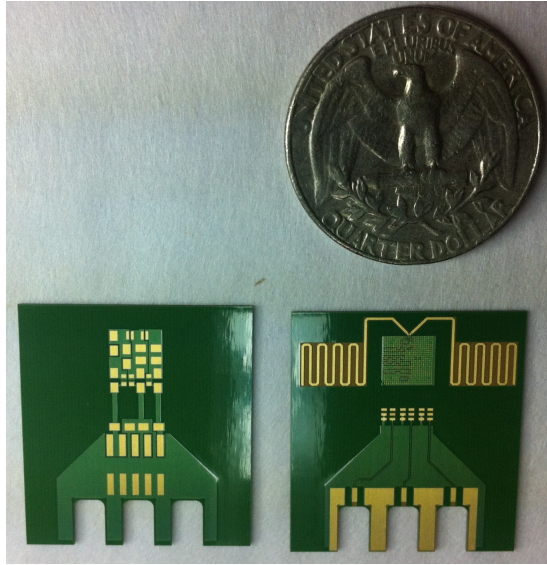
Fabricated board for the CMOS-FEM IC assembly
